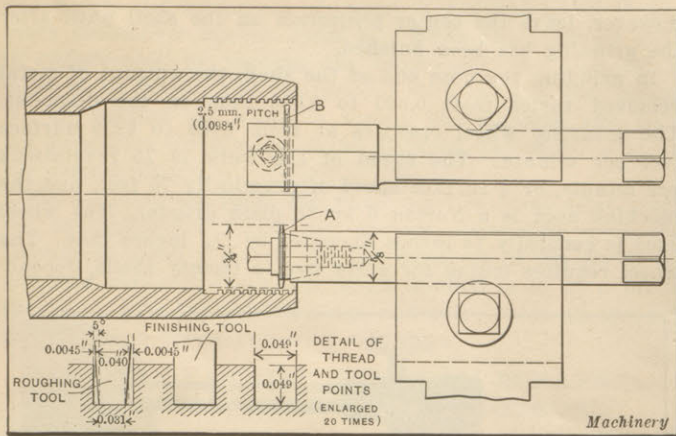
Cutting Square Thread in Nose of French Shrapnel Shell in "Automatic" Threading Lathe
